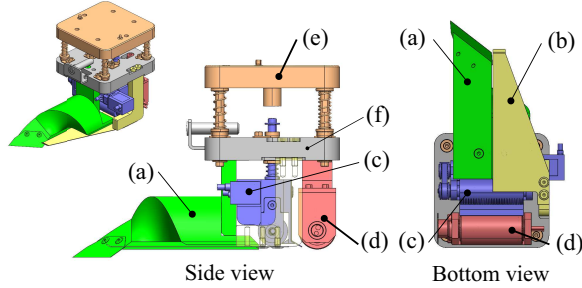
The design of a prototype of F-FOLD. (a) is the turnover mechanism, (b) is the folding guide, (c) is the fabric feeding mechanism, (d) is the heating iron, (e) is the suspension mechanism, and (f) is the base plate.
